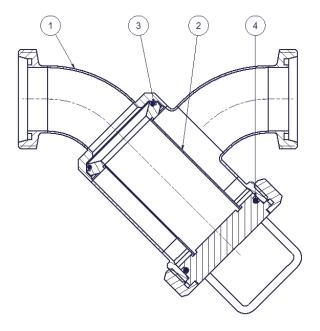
Sectional view dirt collecting filter DIN m/m DN40-DN100
